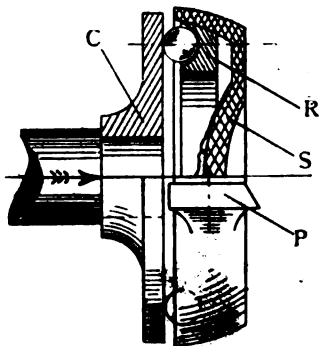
SIMPLE BALL BEARING THRUST BLOCK FOR BOAT OR LATHE.
